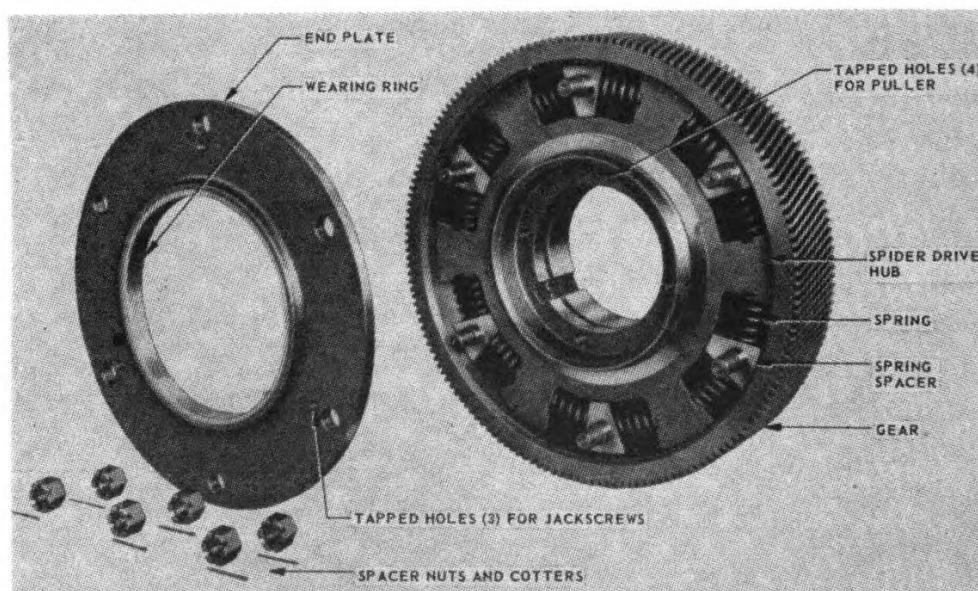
Blower flexible drive gear (FM 38D8 1/8).
